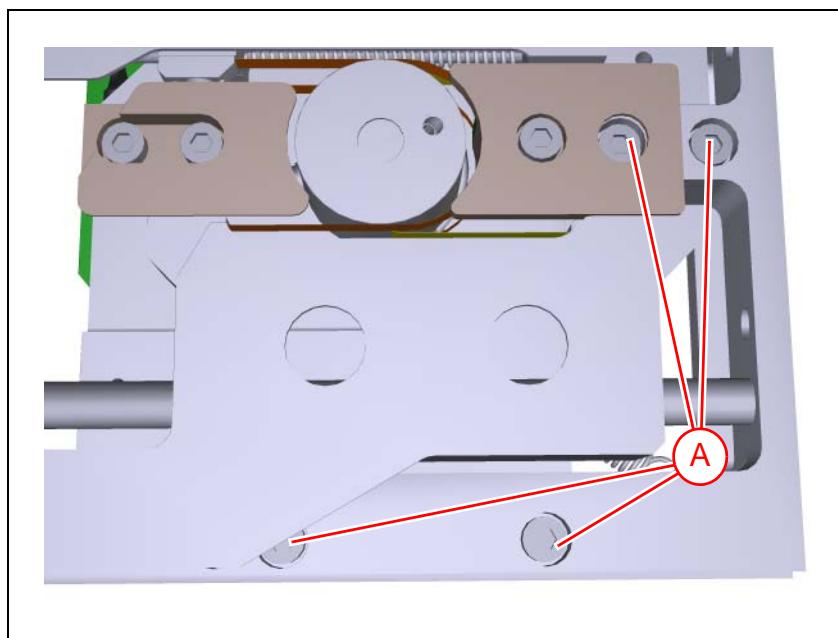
Loosen locking screws, right centering unit (Bottom view).
